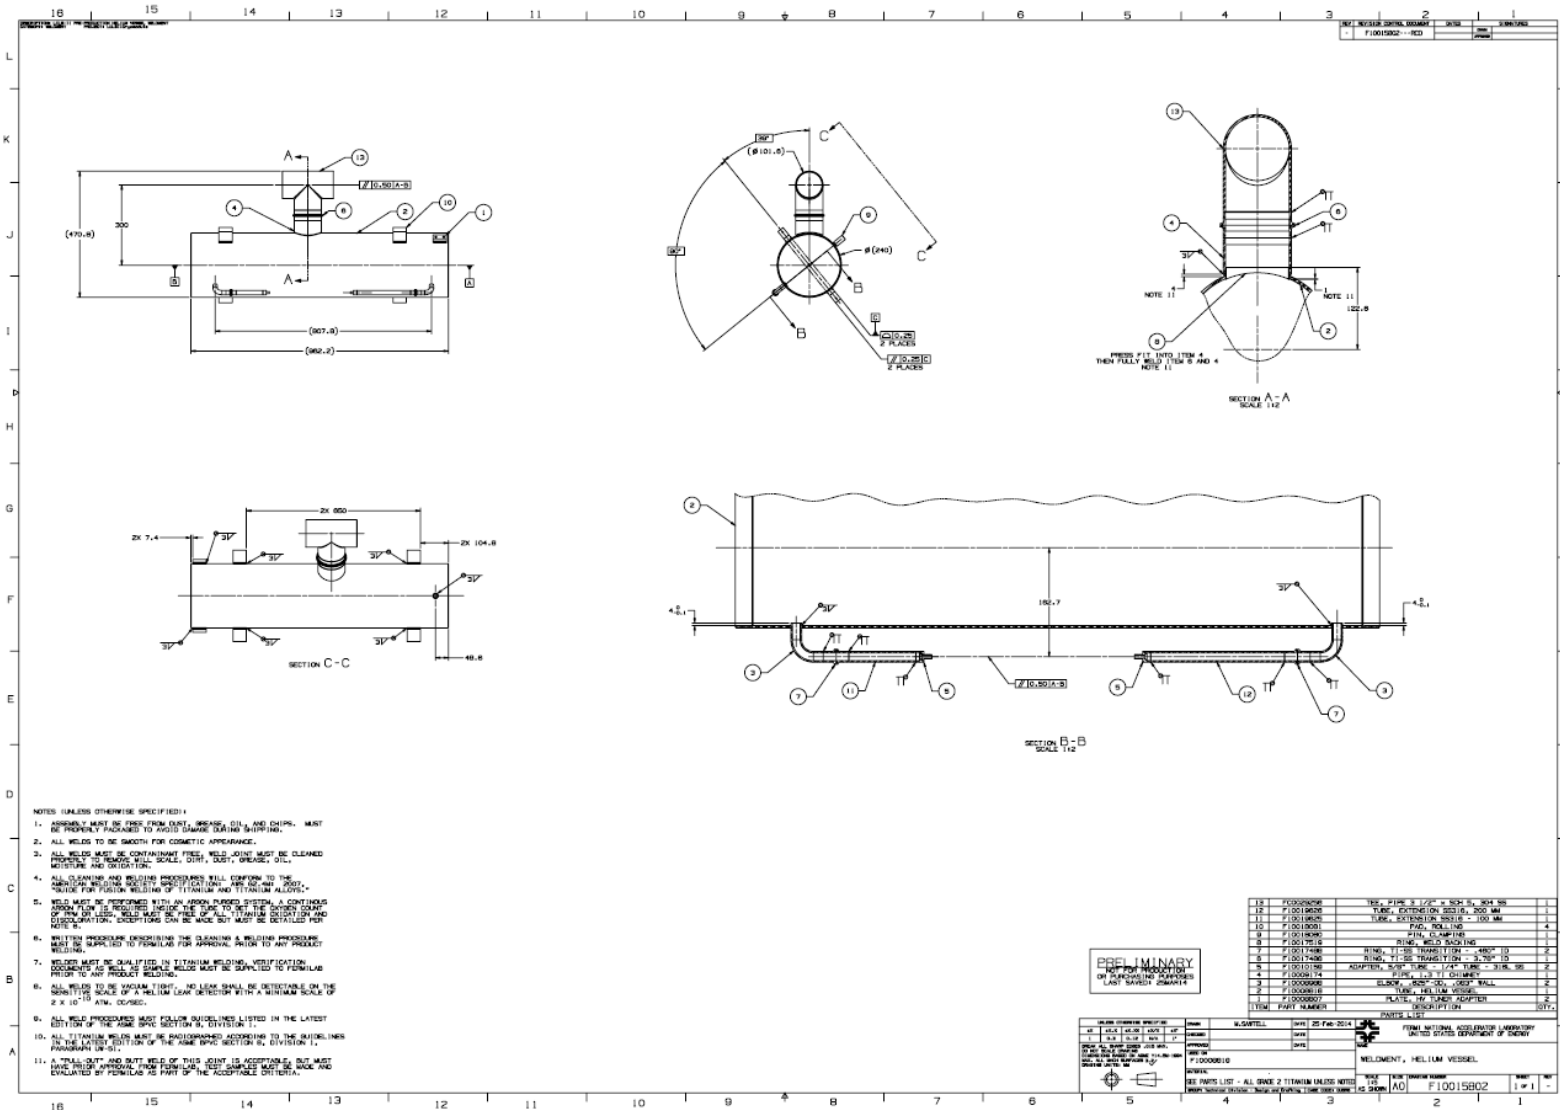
LCLS II Helium Vessel weldment (Drawing F10015802)
